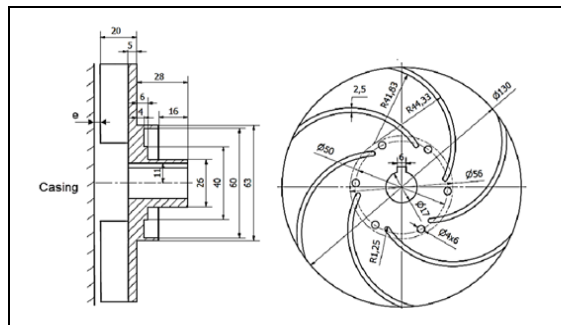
Centrifugal Pump Impeller Detailed Dimensions
